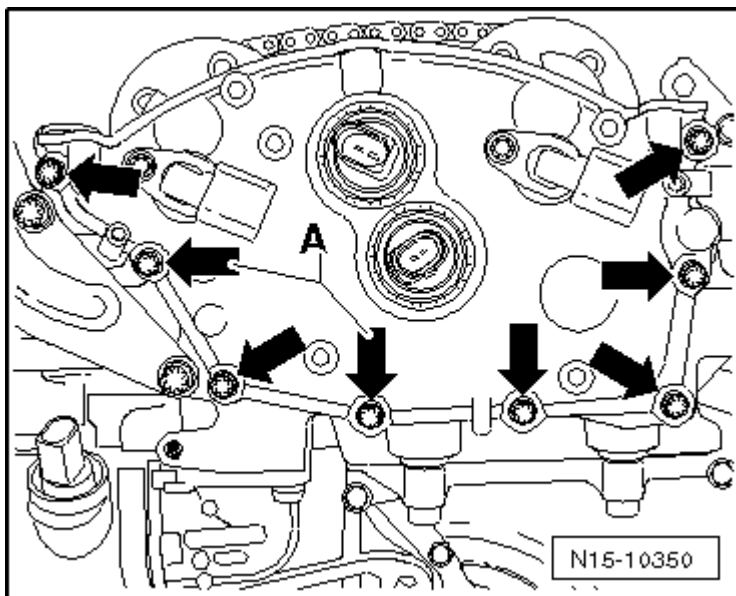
Identifying Cover Piece On Cylinder Head And Mounting Bolts
